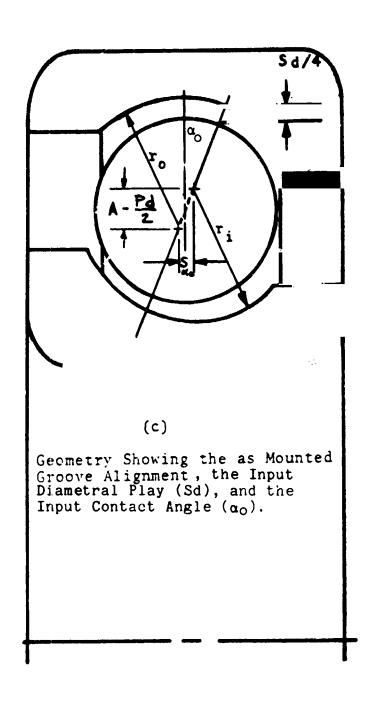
ANGULAR CONTACT BALL BEARING GEOMETRY
